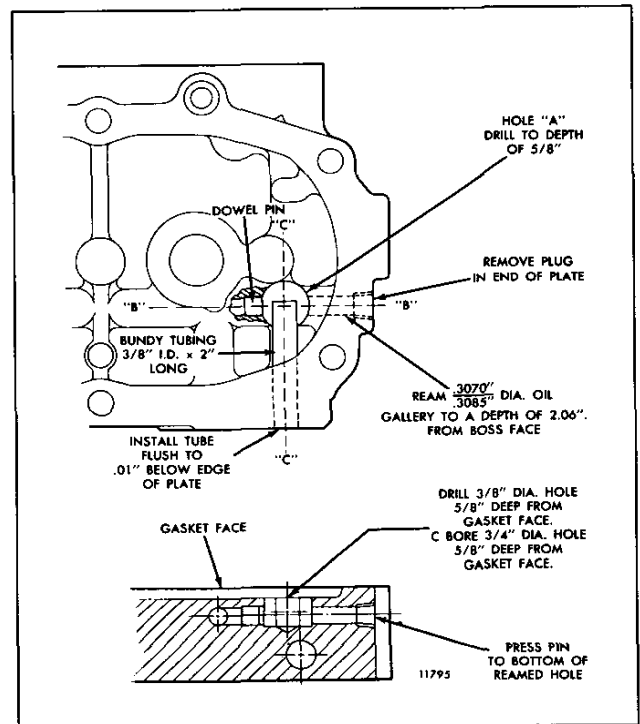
Dimensions for Reworking Front End Plate (6V-53 Engine)
